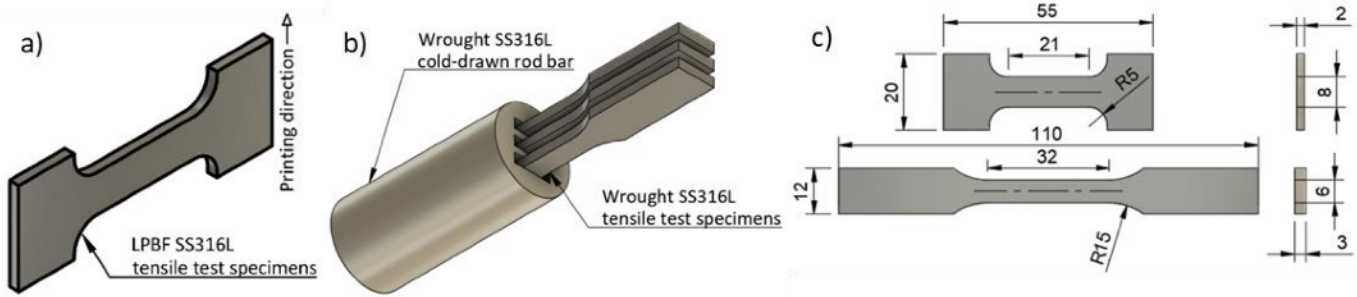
a) Horizontal printing orientation of the LPBF-manufactured SS316L rectangular specimens, b) schematics of the wrought SS316L specimens machined from a 25 mm (1 in) diameter cold-drawn rod bar, and c) drawings showing the geometry and dimensions in mm of the rectangular specimens used for tensile testing LPBF SS316L (top) and wrought SS316L (bottom).
